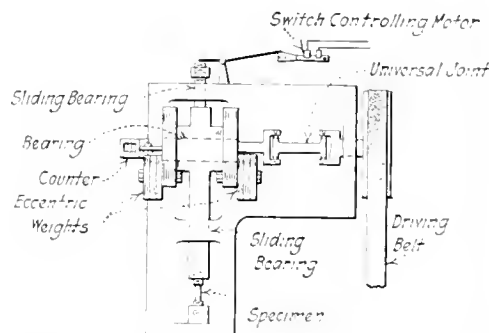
SPECIAL FORM OF REPEATED-STRESS TESTING MACHINE
